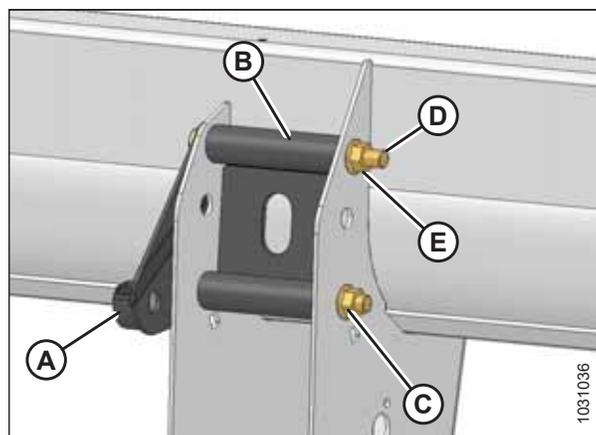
Upper Bracket – 15-Footer Header Shown
